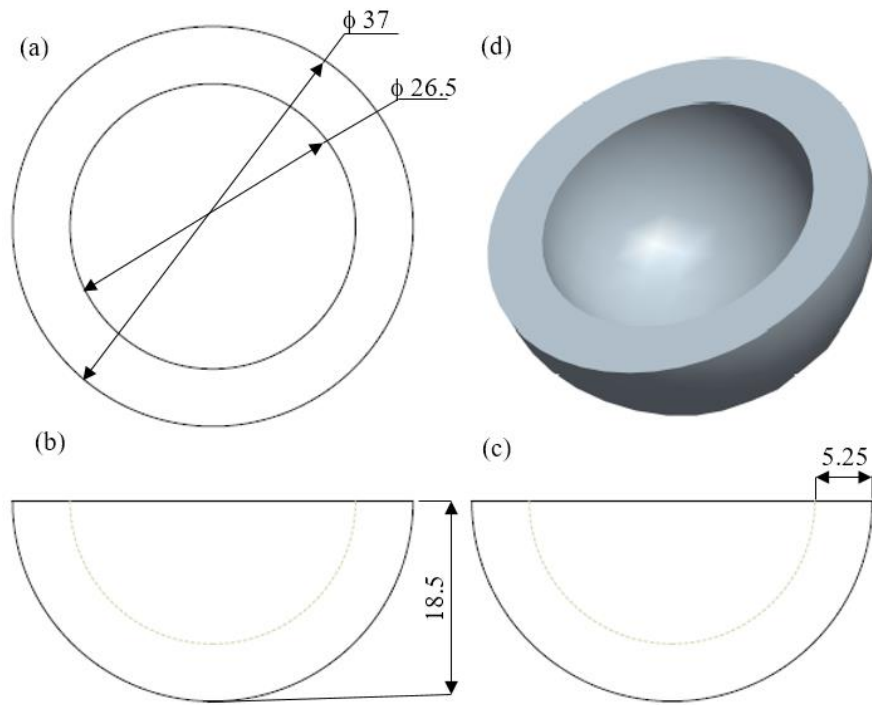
Projected orthographic view (a) top view (b) front view (c) side view and (d) isometric view of the selected acetabular socket
